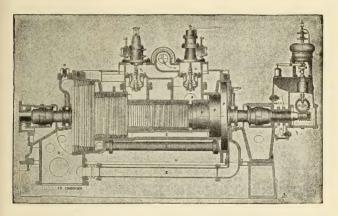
Sectional View of a Westinghouse-Parsons Turbine, Showing ARRANGEMENT OF BALANCING PISTONS P. P. P.
